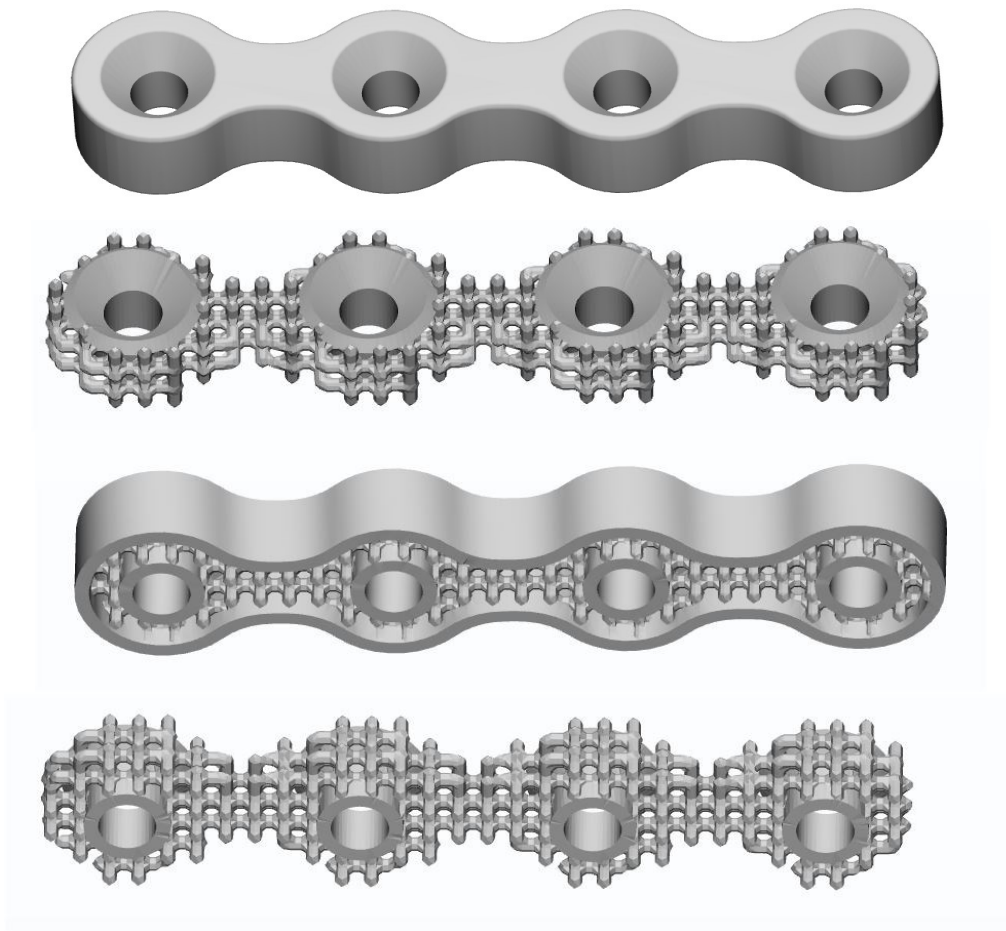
Top and bottom views of a sample porous skeletal fixation plates before and after adding a thin cover
